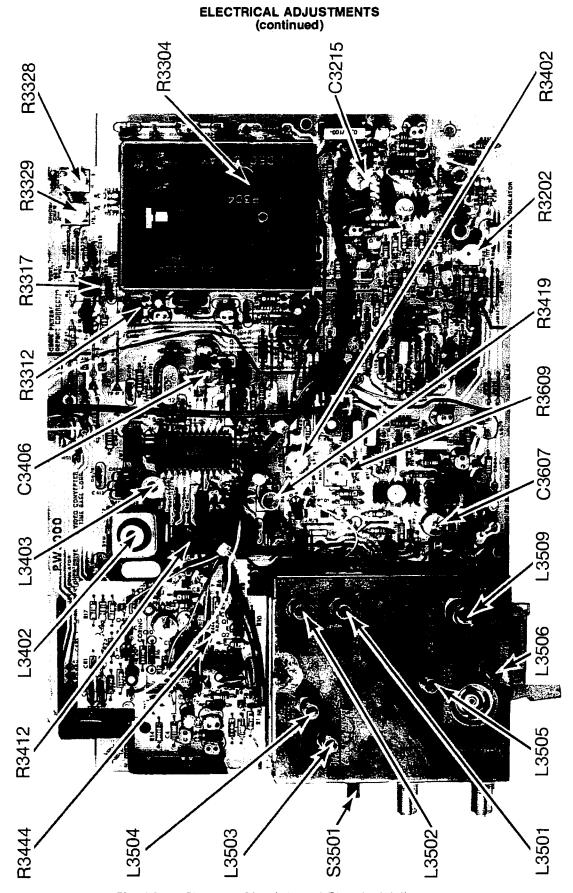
PW 3000 Circuit Board Electrical Adjustments
